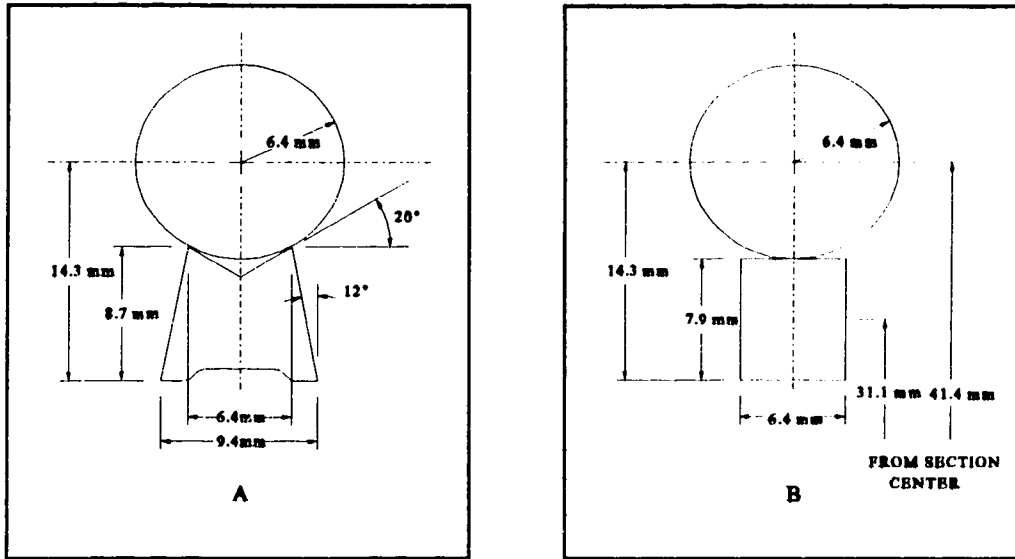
Bearing Shaft and Support Rail Assembly Geometry and Approximation
